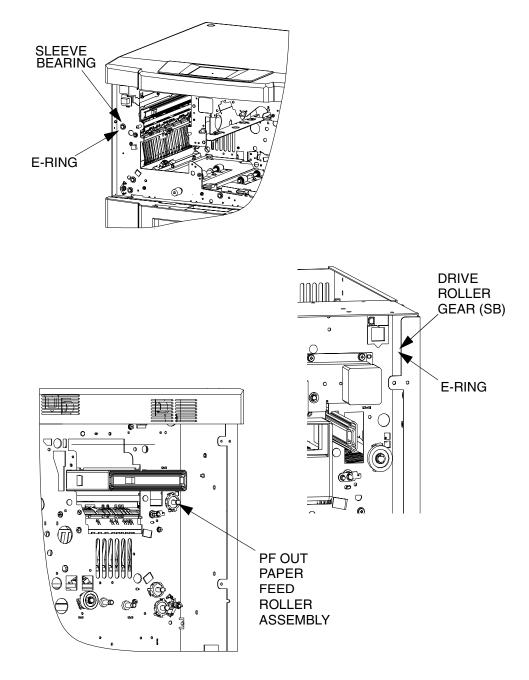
2 Removal of the PF Out Paper Feed Roller Assembly
